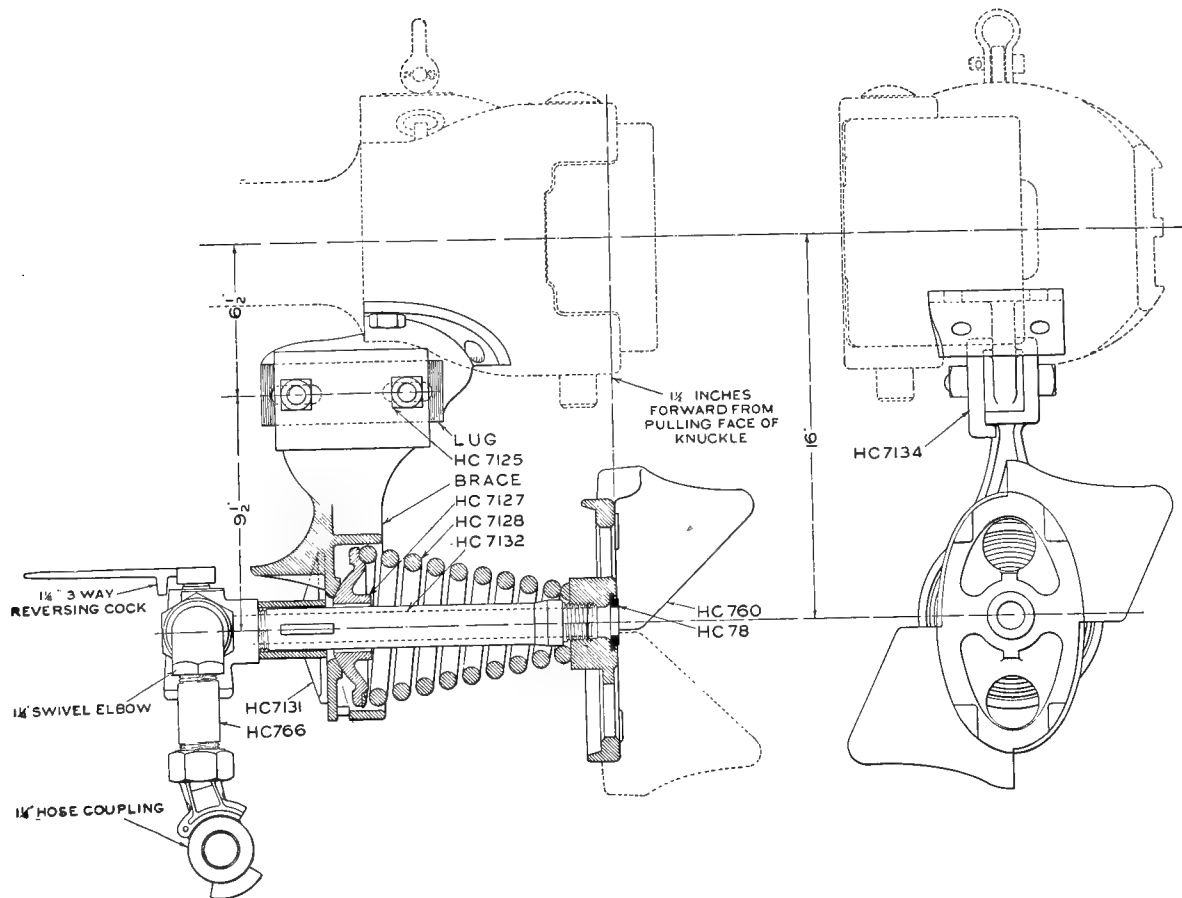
Freight Connector for Air Brake Pipes. New York Air Brake Company.
